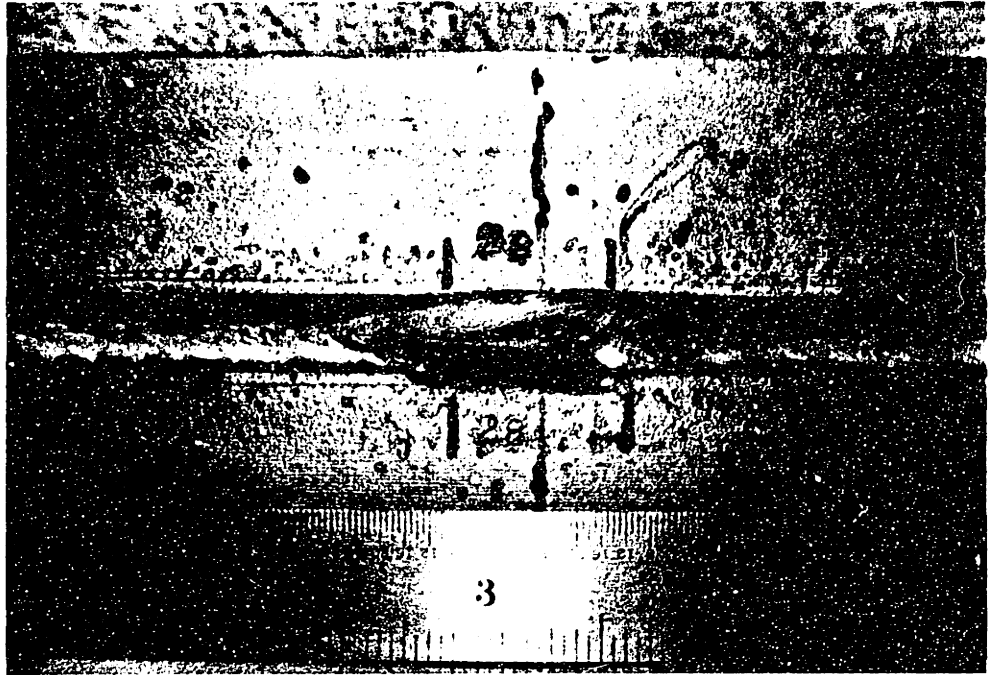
(k) TW 24, 25 after final welding
